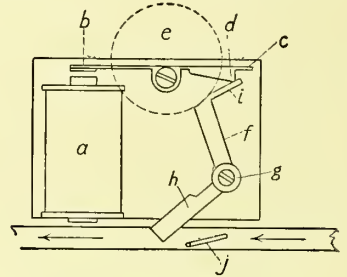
Details of Movement in a Mechanical Replacement Indicator
